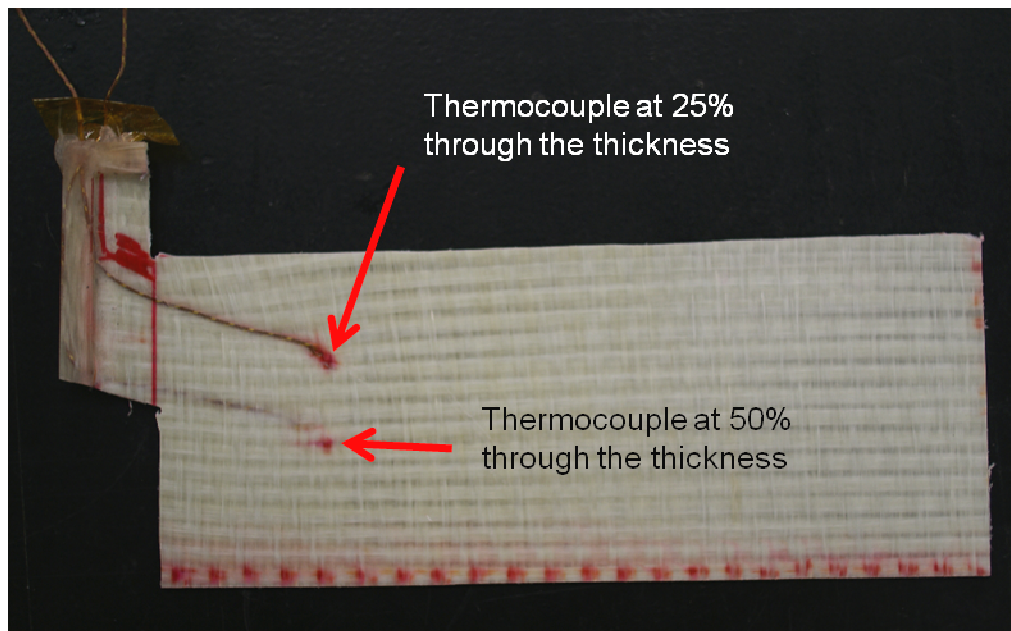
Stamp forming sample, pre-consolidated prior to forming
